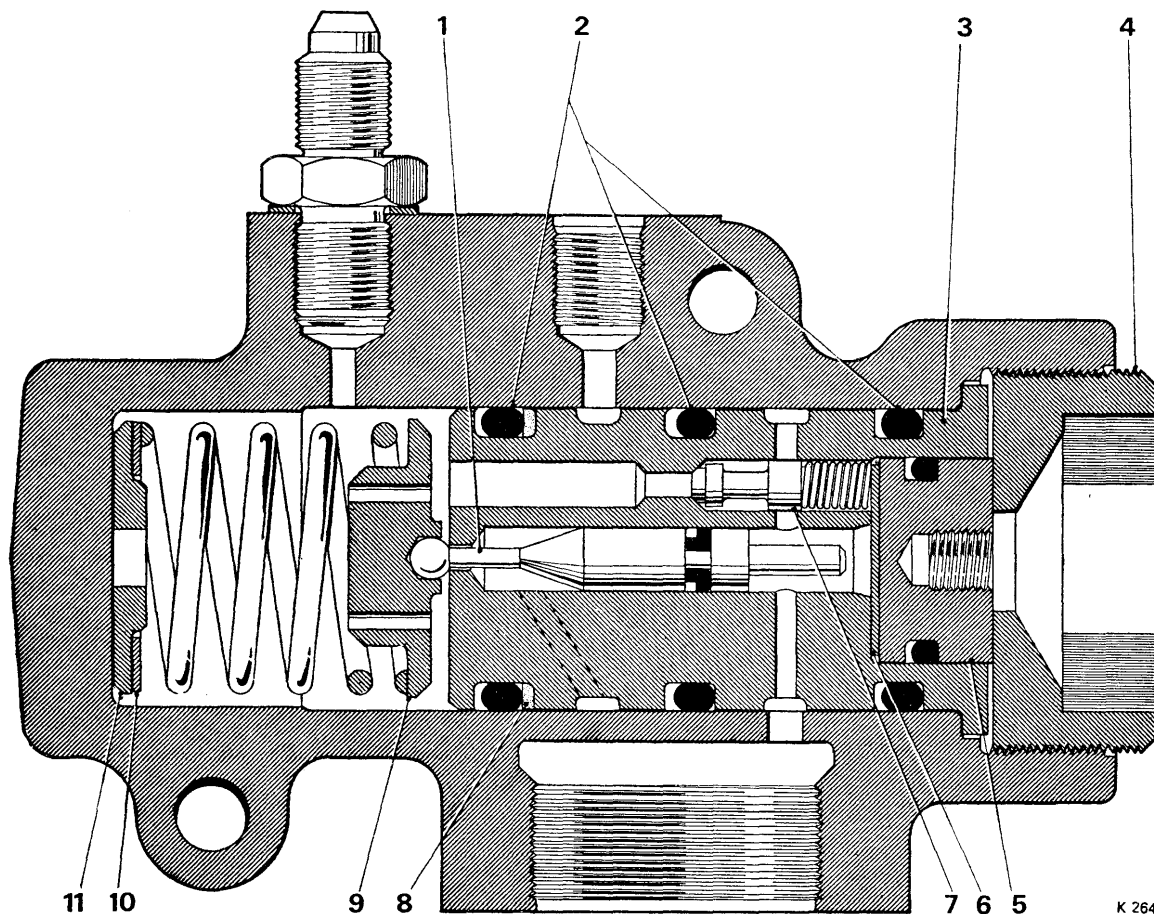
SECTIONAL VIEW—ACCUMULATOR VALVE
